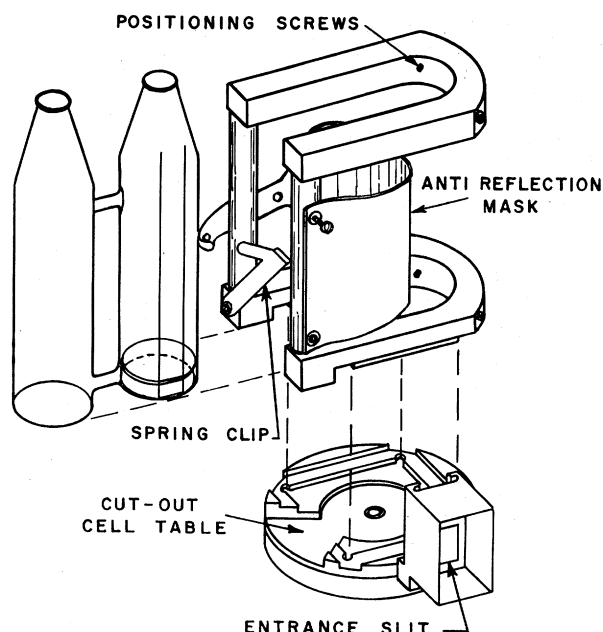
Exploded view of cell, cell holder, and photometer table.
